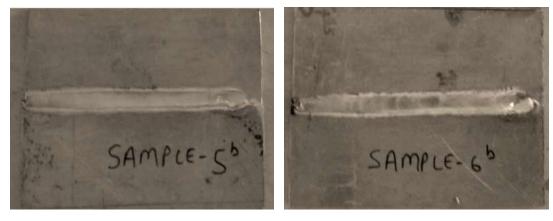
Both side TIG welded samples prepared with (a) welding current 180 A, welding speed 3 mm/s (b) welding current 180 A, welding speed 3.5 mm/s
